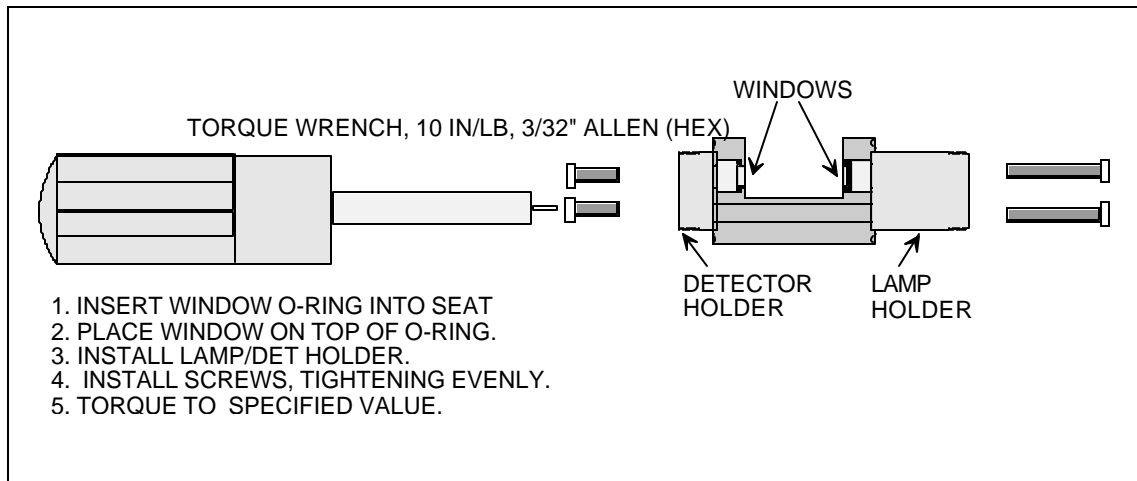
Window O-Ring, Lamp/Detector Holder Torque Method
